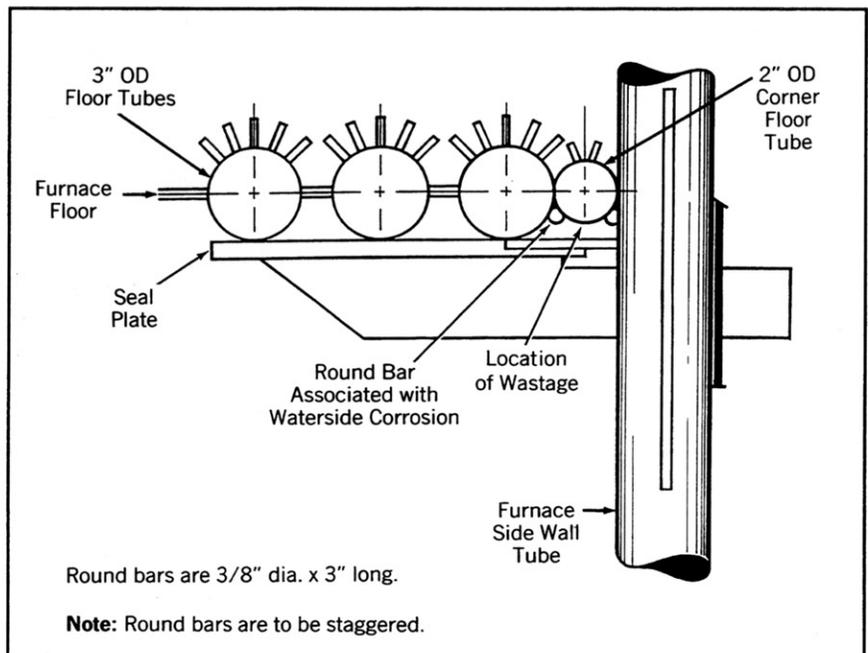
Example of 3/8" round bar welded to two sides of the corner floor tube and staggered on six foot centers.
